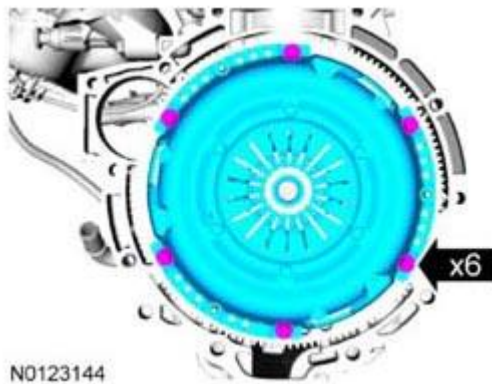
Locating Clutch Pressure Plate Retaining Bolts
